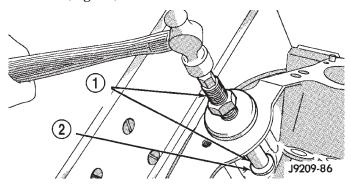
Distributor Driveshaft Bushing Installation 1 – SPECIAL TOOL C-3053
